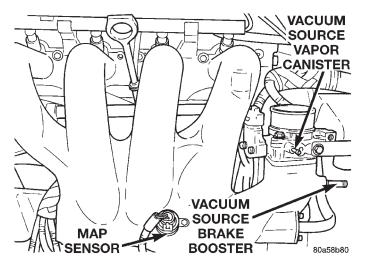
Manifold Absolute Pressure (MAP), Vapor Canister Hose, and Brake Booster Hose
